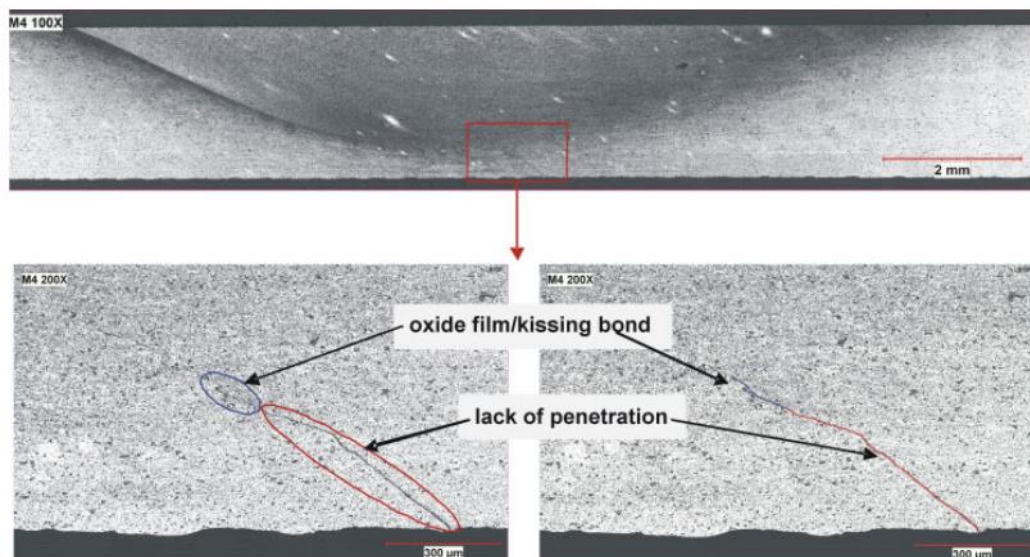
Example of Lack of Penetration in a Friction Stir Welded Joint
